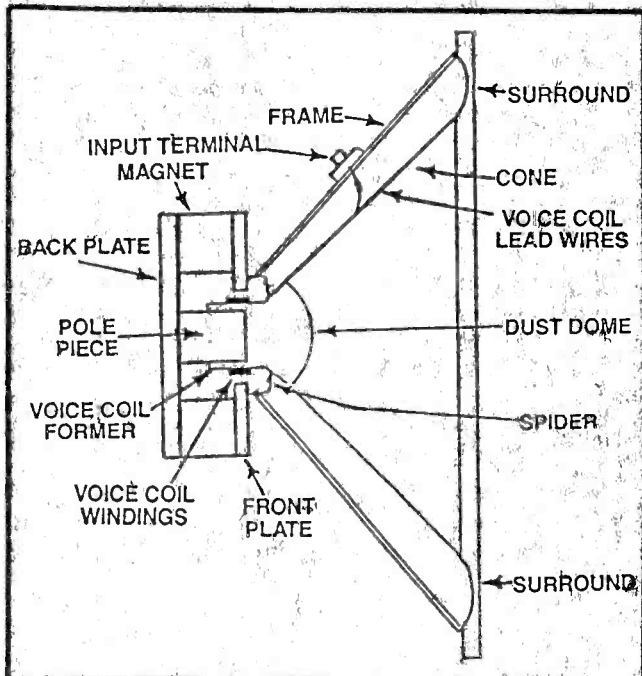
Cutaway view of a typical moving-coil loudspeaker.
